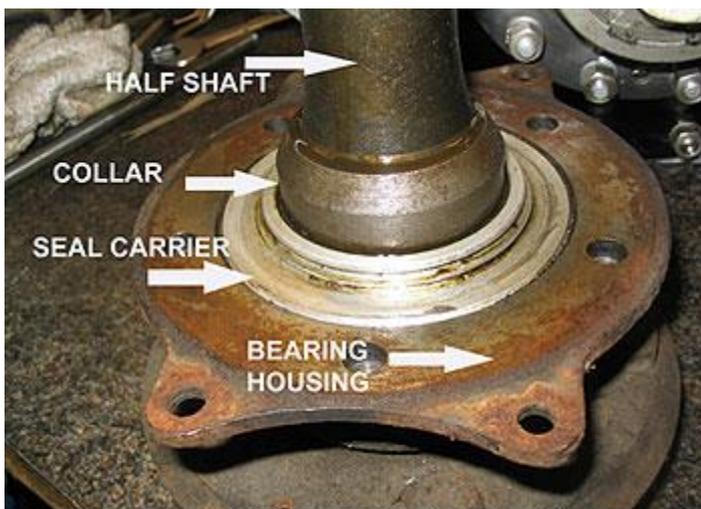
An old half shaft and bearing assembly after withdrawal from the axle tube
